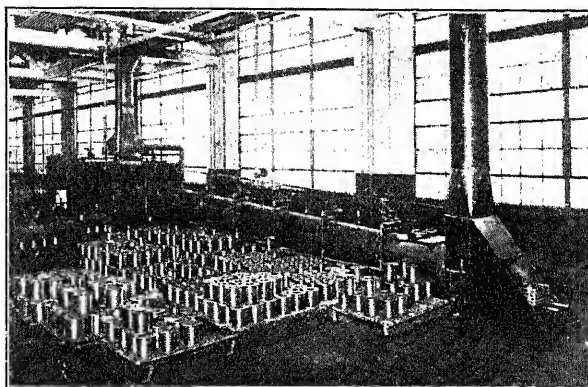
STEAM-SEAL ANNEALING FURNACE
